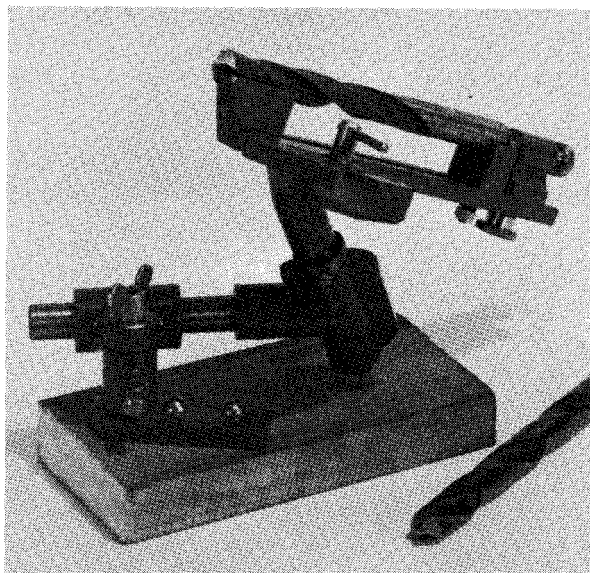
The Potts drill sharpening fixture for use on the bench grinder.
